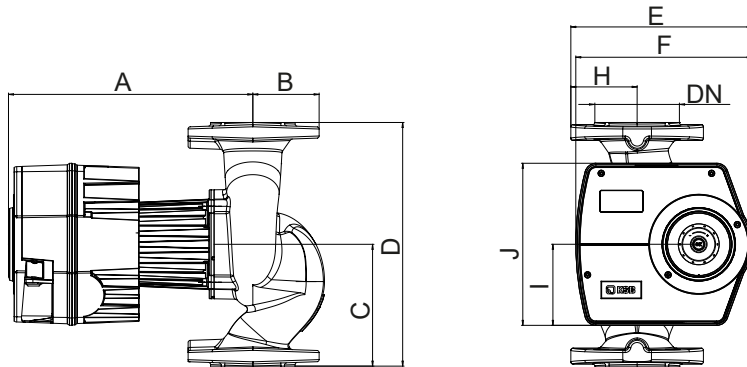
Flanged pump set ($P_1 > 400$ W)
